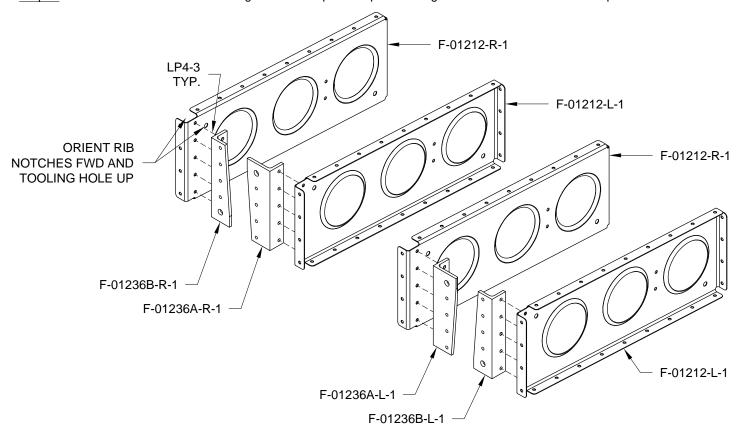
RIVETING STEP RIB ASSEMBLIES
